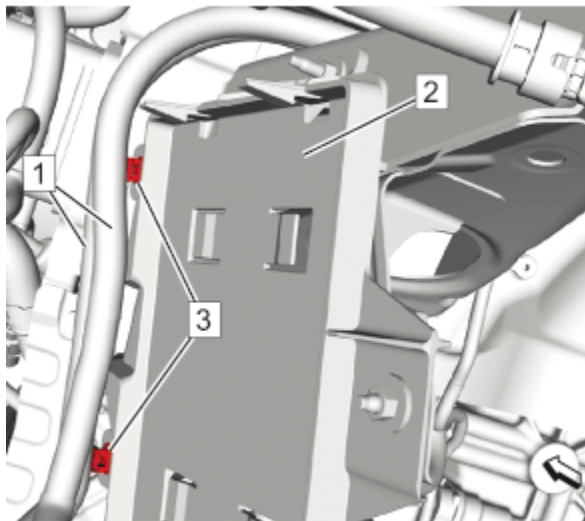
Engine Control Module Bracket, Wiring Harness And Retainers
